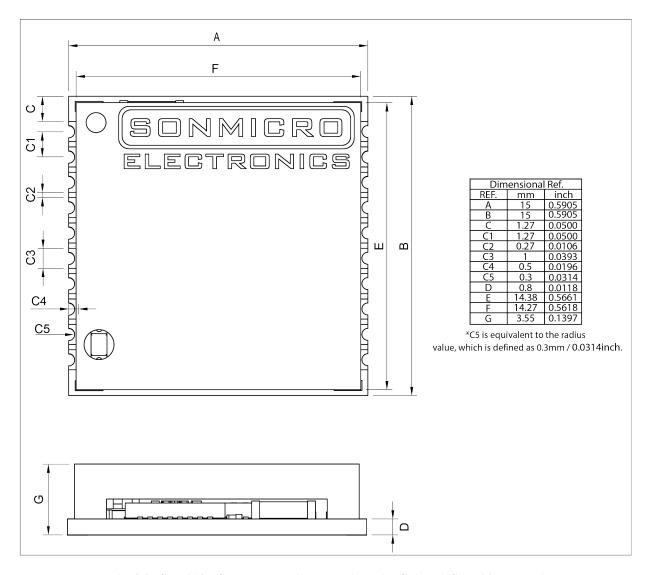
SM5212-uSMD Mechanical Drawing with Shield (uSMD20 Package)
